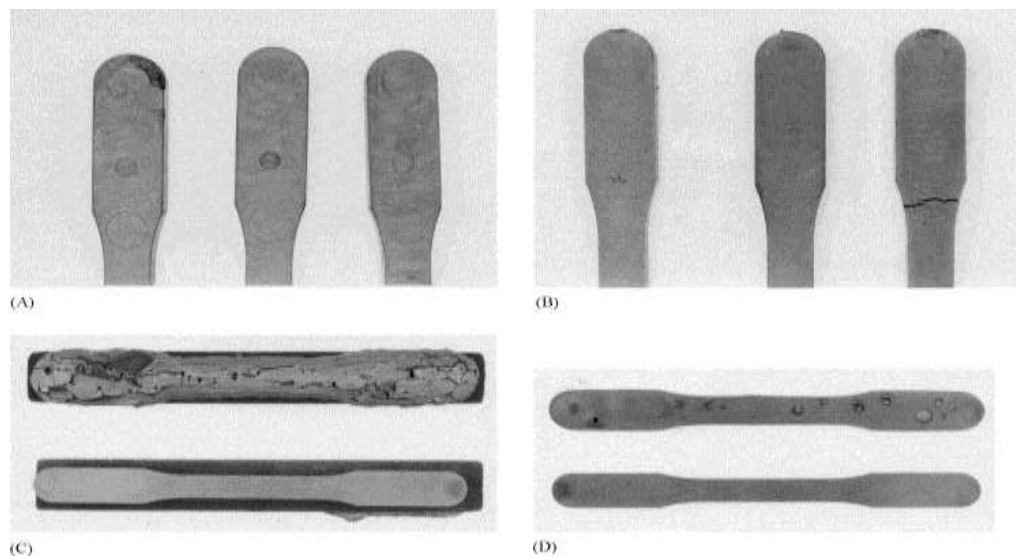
Defects in PIM (A) Crumbled edges — speed profile (left to right) (B) Cracks — packing pressure profile (left to right) (C) Flaking of a debound part (upper picture) for the debinding & molded part (lower picture). (D) Blisters on a debound part (upper picture) & Molded part (lower picture) [9]
